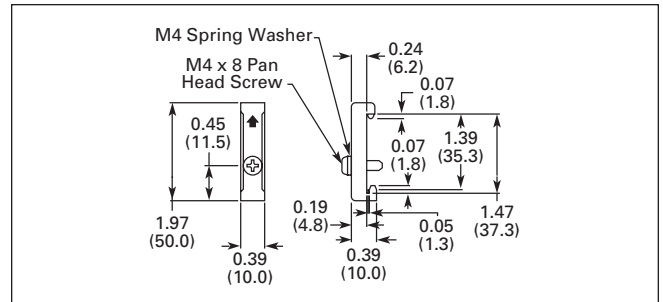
PFP-M DIN Rail End Stop — Approximate Dimensions in Inches (mm)
